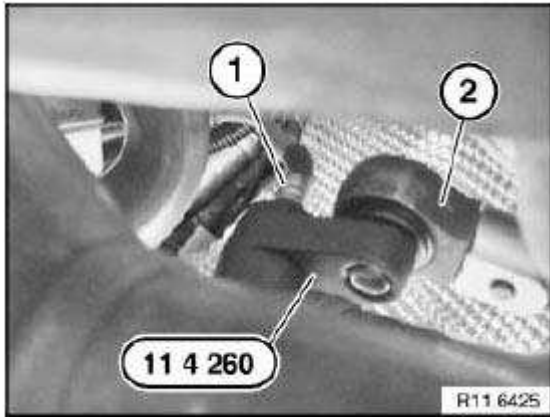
Removing Lambda Oxygen Control Sensor Using Special Tool 11 4 260
